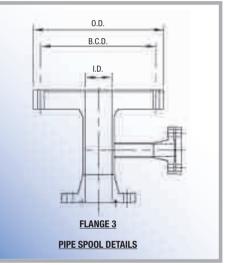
The figures shown here represent configuration 1 for special flange joints in a single-pass, floatinghead shell-and-tube heat exchanger
